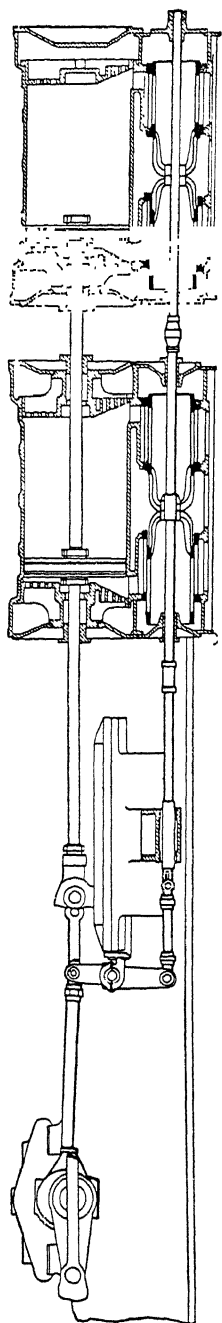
CHARGING-PUMP VALVE-MOTION OF THE SIEGENER MASCHINENBAU-AKTIEN-GESELLSCHAFT, SIEGEN.
